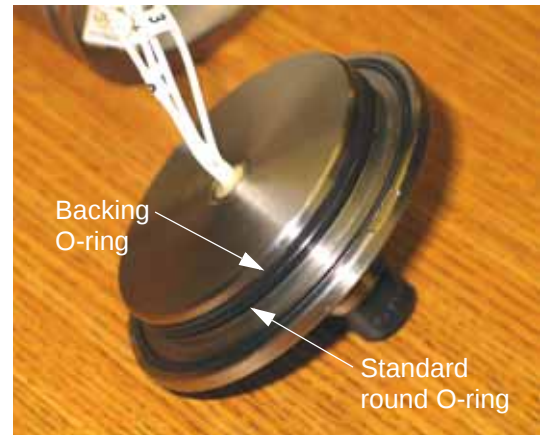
Backing and Standard Round O-rings Installed in O-ring Groove in End Cap
